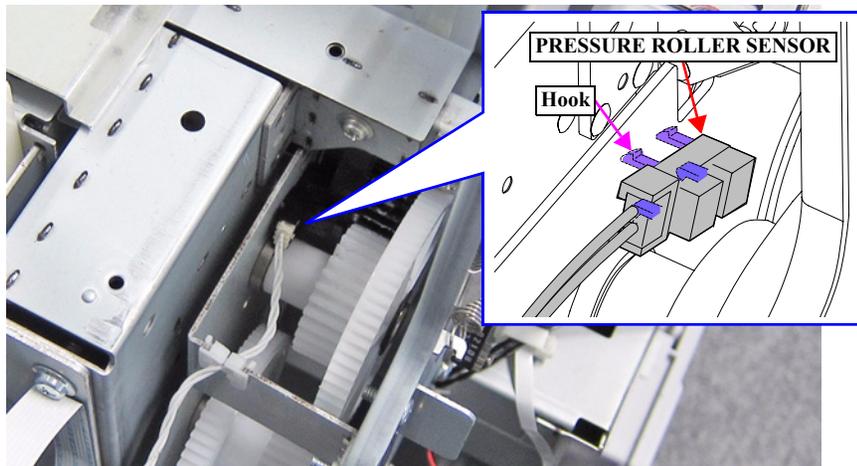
Removing the PRESSURE ROLLER SENSOR (2)
